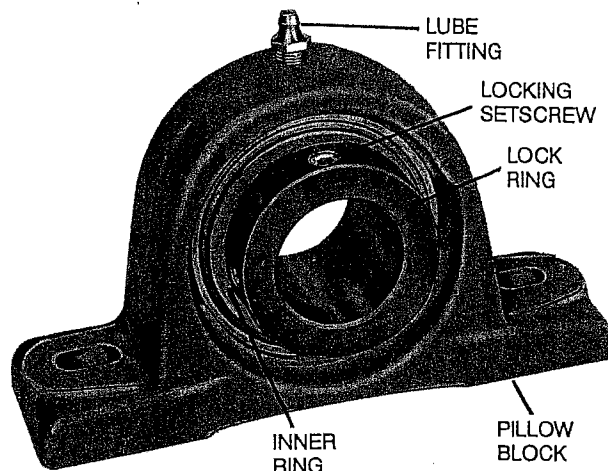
BEARING WITH SETSCREW TYPE LOCKING DEVICE
